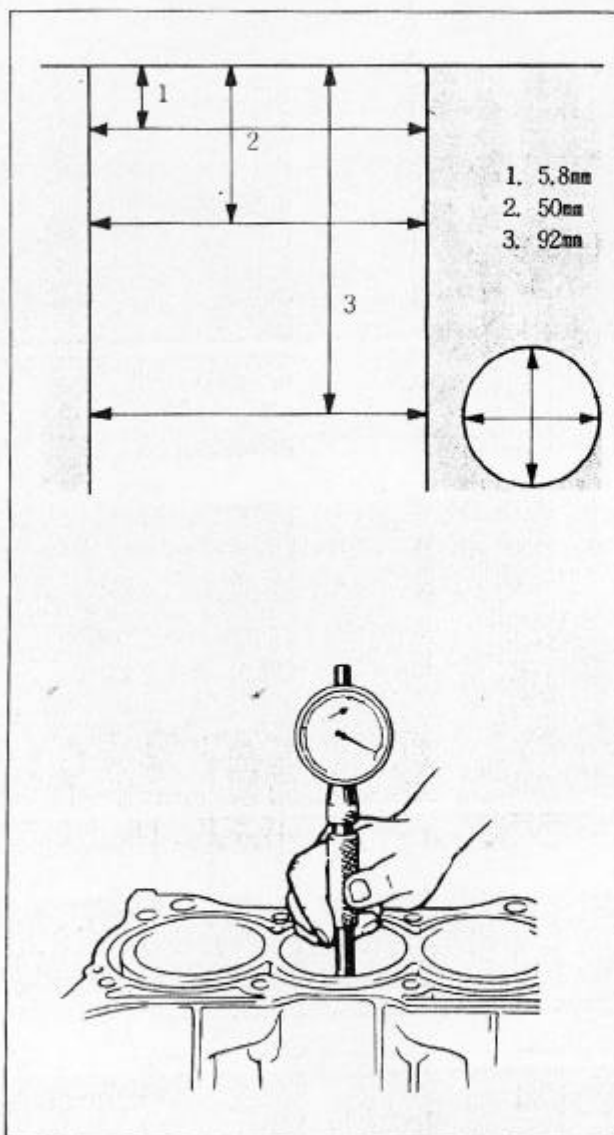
A — 77 MEASUREMENT AND MEASURING LOCATION OF CYLINDER BORE DIAMETER
